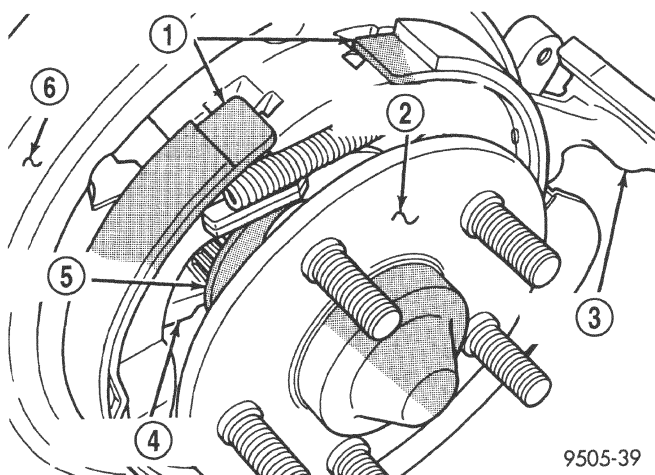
Rear Wheel Speed Sensor With Drum Brakes
